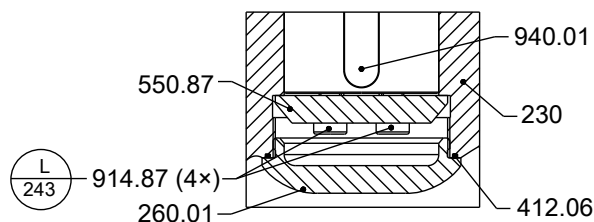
Removing K impeller from pump with bearing bracket S09/S10
